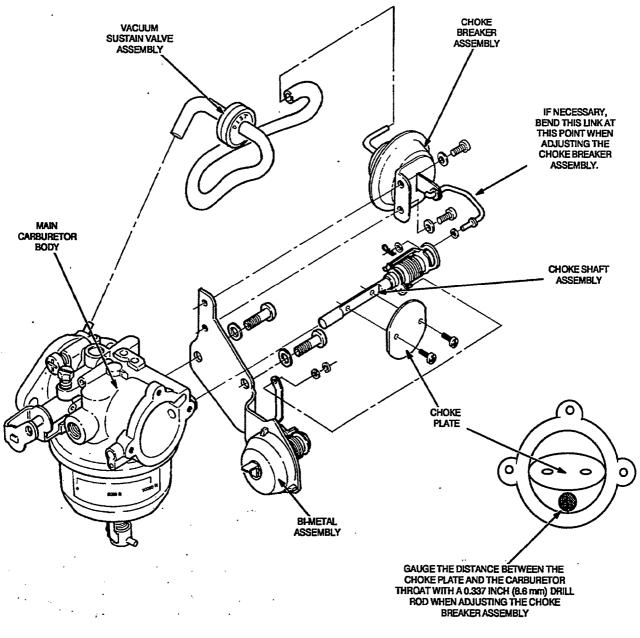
CHOKE ASSEMBLY-SPEC F
